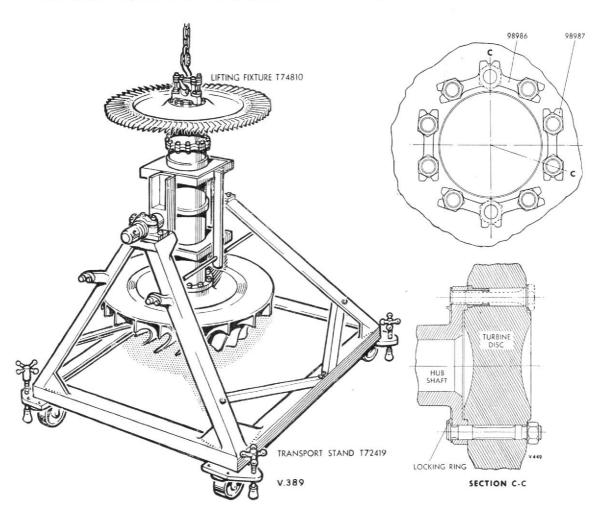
(left). Lowering turbine disc on to hub shaft.
